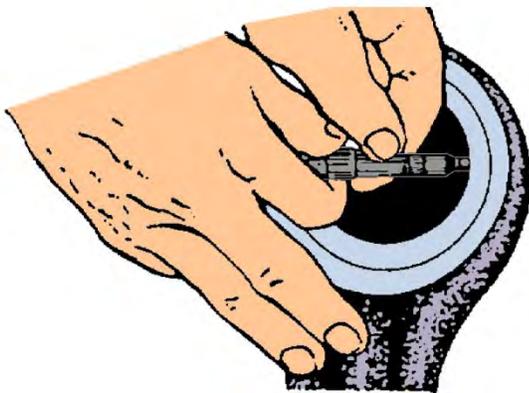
Measuring a piston pin and piston bushing for wear.
